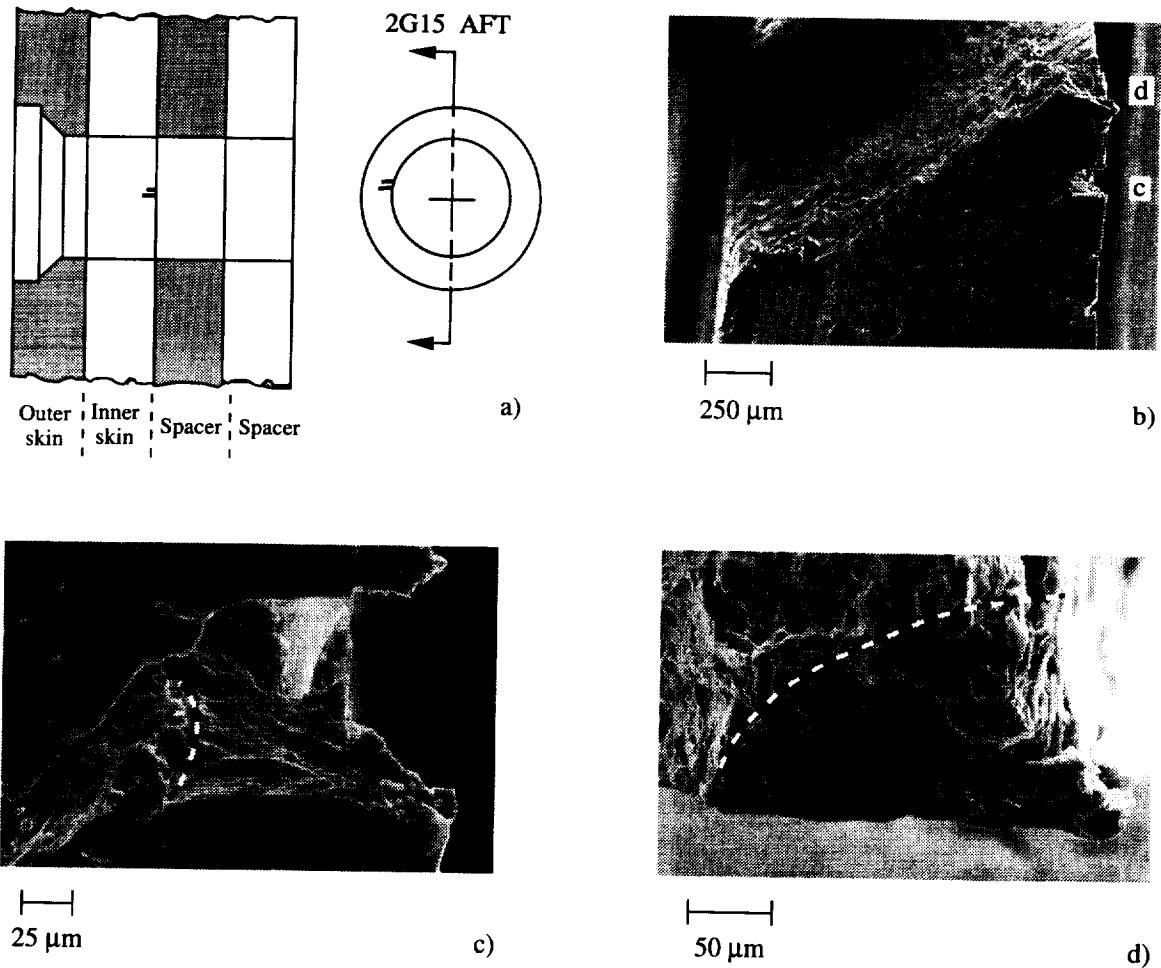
a) The schematic shows the rivet hole 2G15 configuration and the location of the inner skin fatigue crack oriented in the aft direction and about the 9 o'clock position. b) The SEM micrograph shows the rivet hole surface that has been partially fractured during the straining operation. Two fatigue cracks are noted at "c" and "d" along the outboard corner. c) The SEM micrograph shows the partially opened corner fatigue crack at region "c" in Figure 7.43.b. The dashed line marks the fatigue crack front. d) The SEM micrograph shows the corner fatigue crack at region "d" in Figure 7.43.b). The dashed line marks the fatigue crack front. The crack initiated at the burr on the corner.
